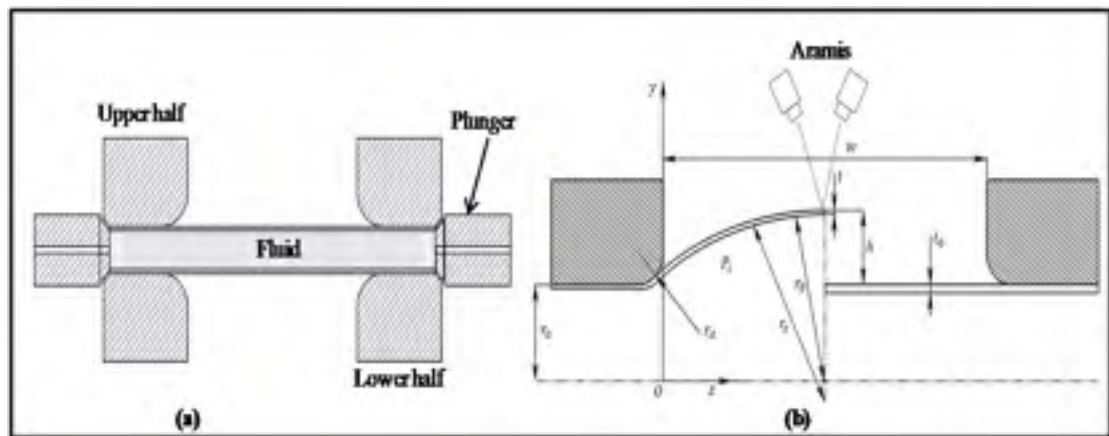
Schematic diagrams of (a) the tube free expansion tool and (b) the test setup with the 3D deformation measurement system.
